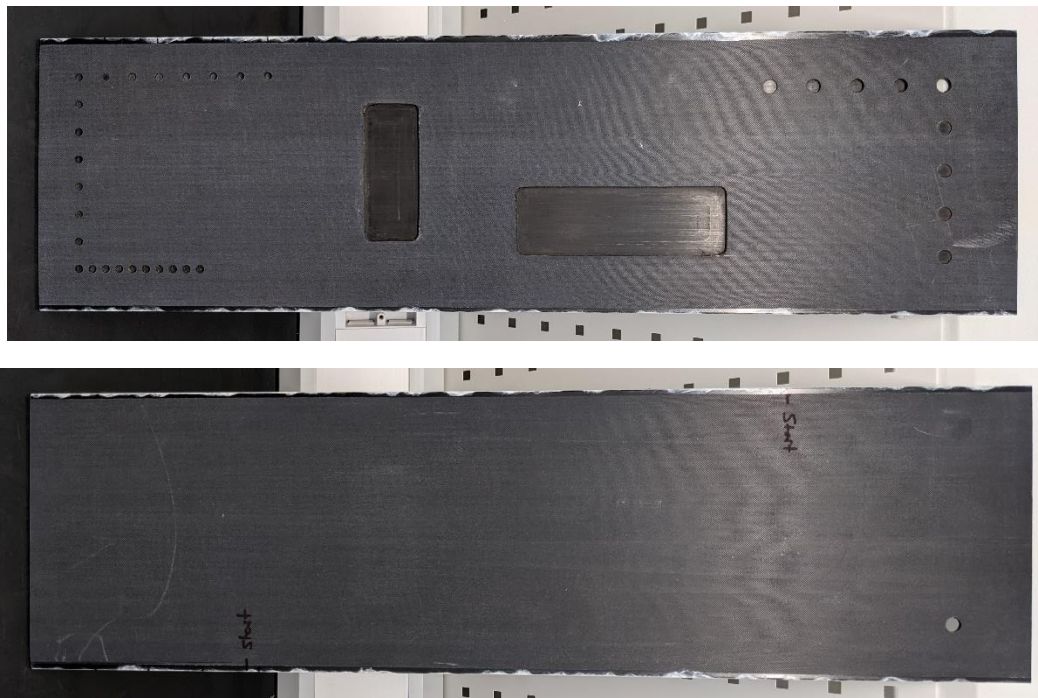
Images of a pultruded CFRP sample with artificial defects machined.
